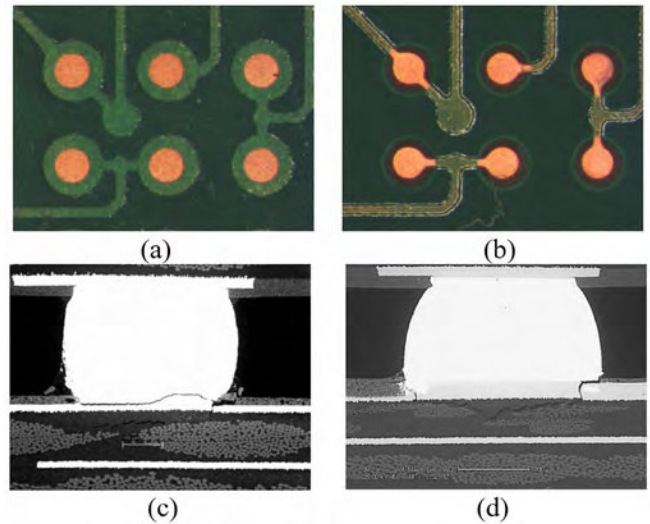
(a) Redesigned test board and (c) its failed joint; (b) previous test board and (d) its failed joint.
